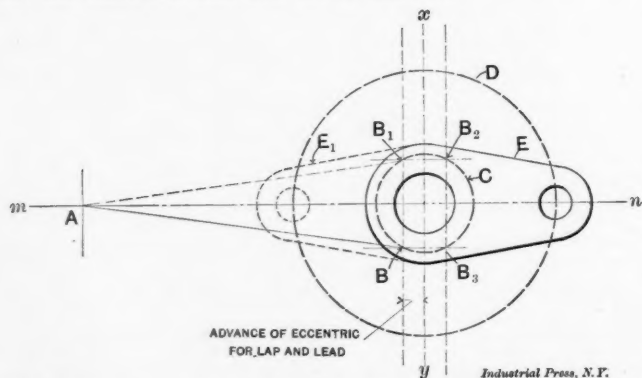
Diagram Illustrating the Method of Reversing a Single Valve Engine
